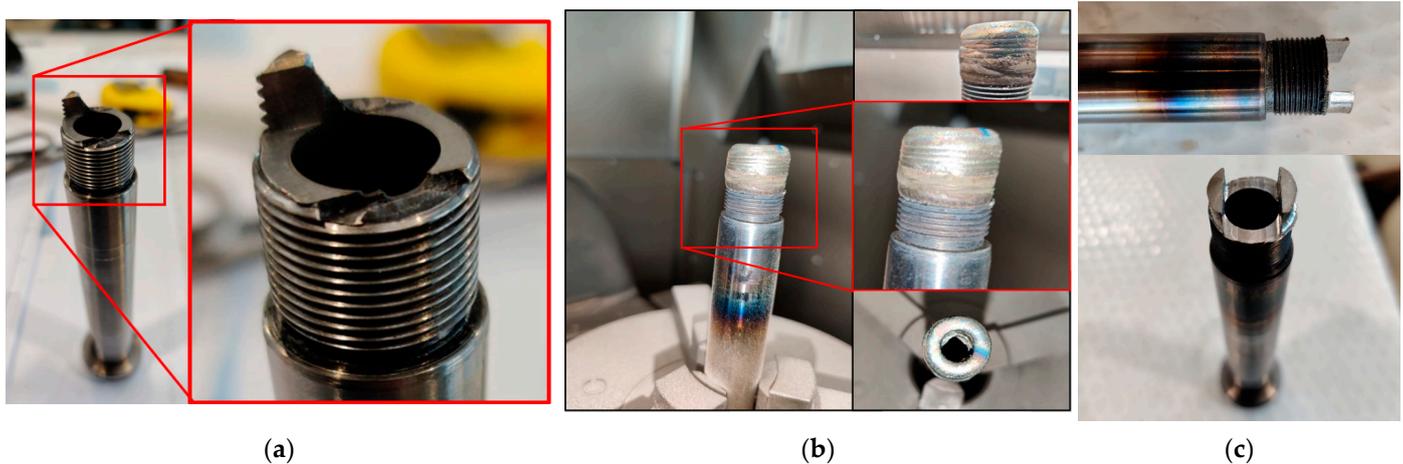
(a) Damaged drive shaft; (b) damaged part after DED process; (c) drive shaft after the milling process (finished product).
